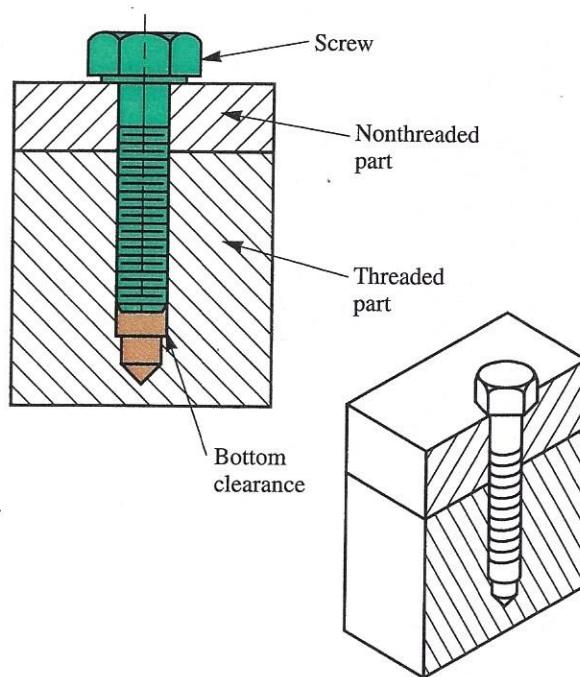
Screw passes through one part and threads into mating part. Note clearance at bottom of hole.
